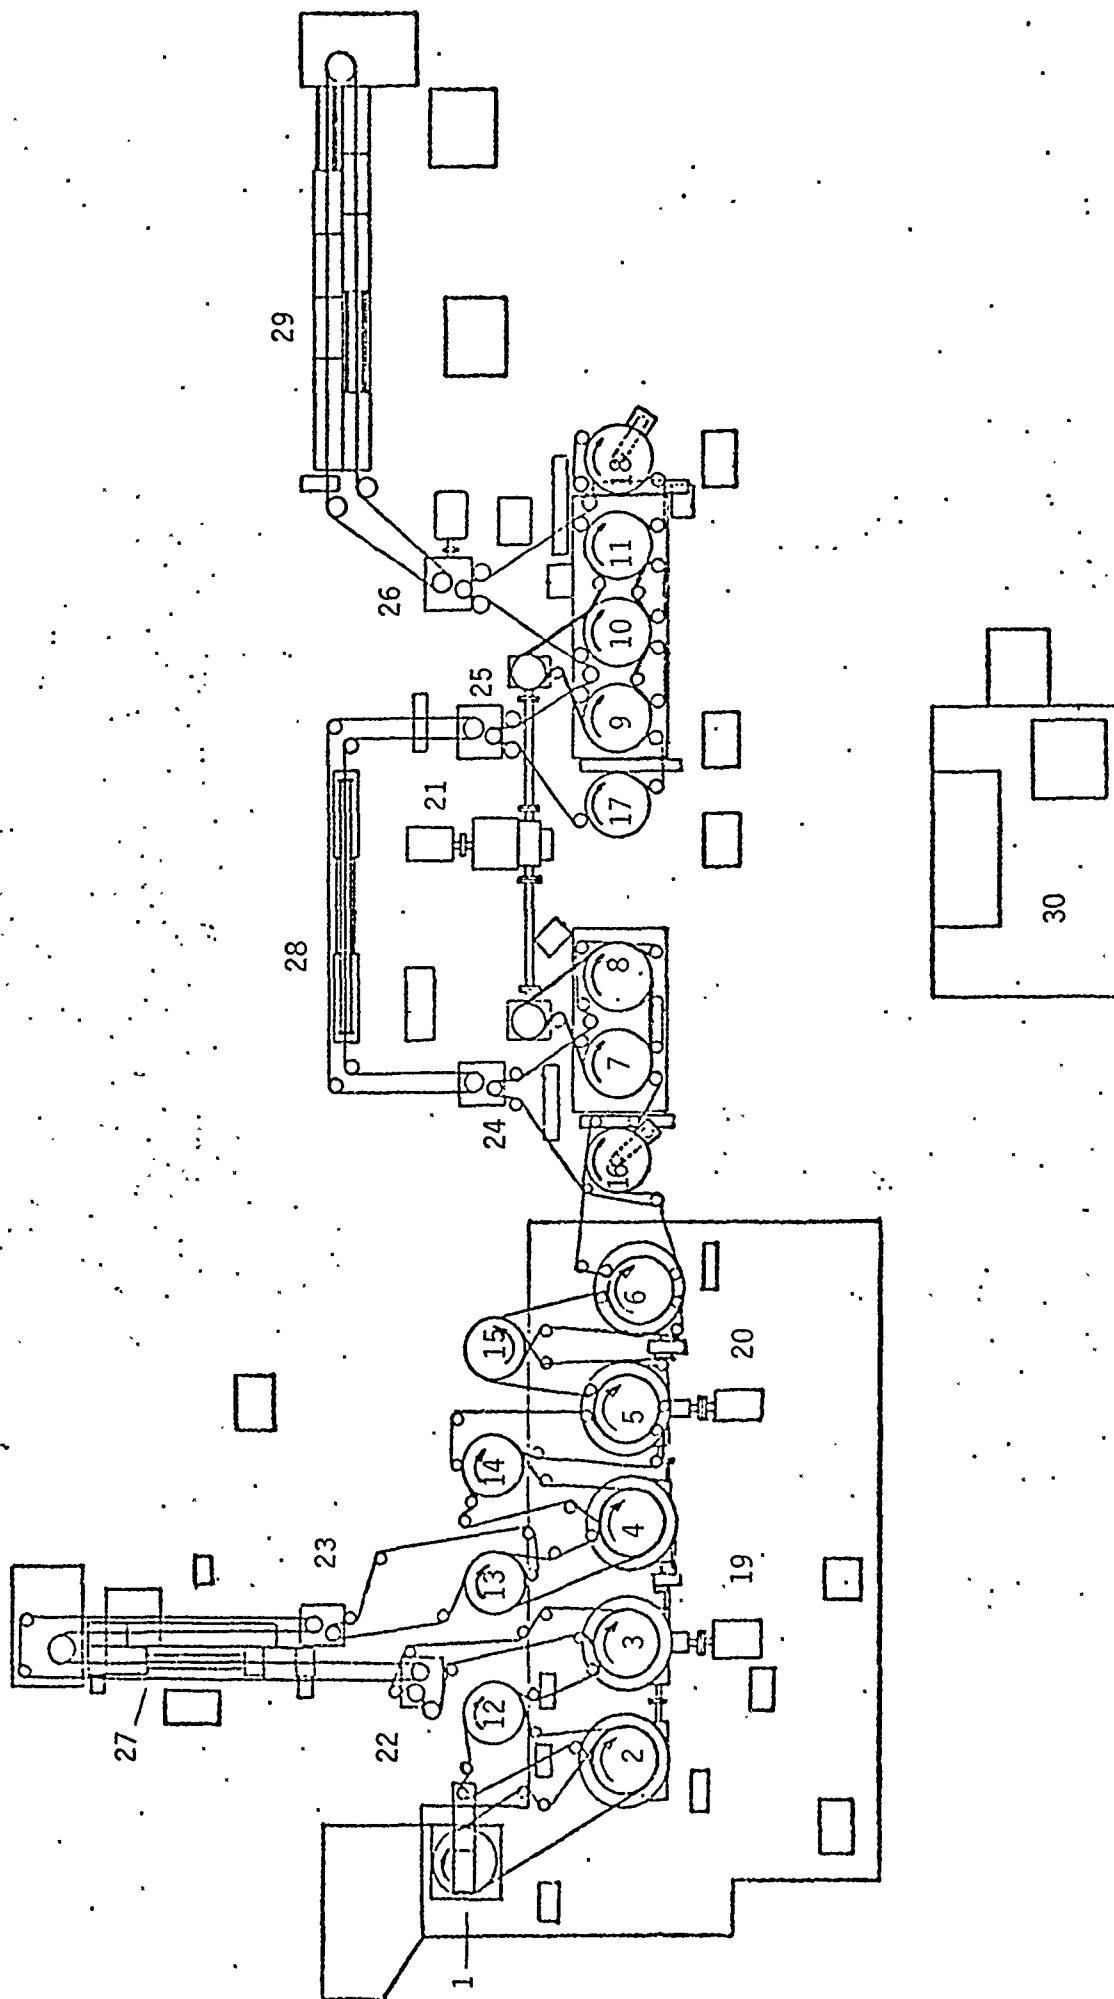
EQUIPMENT LAYOUT SCHEMATIC
